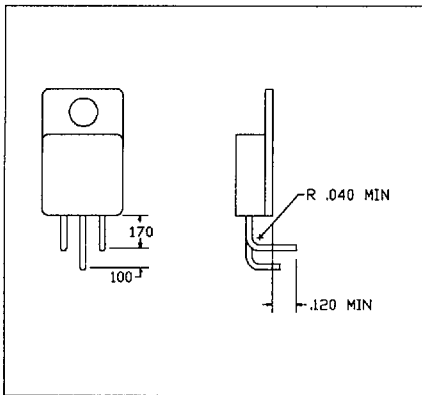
CLAW BEND TO257AB (C-SUFFIX)
